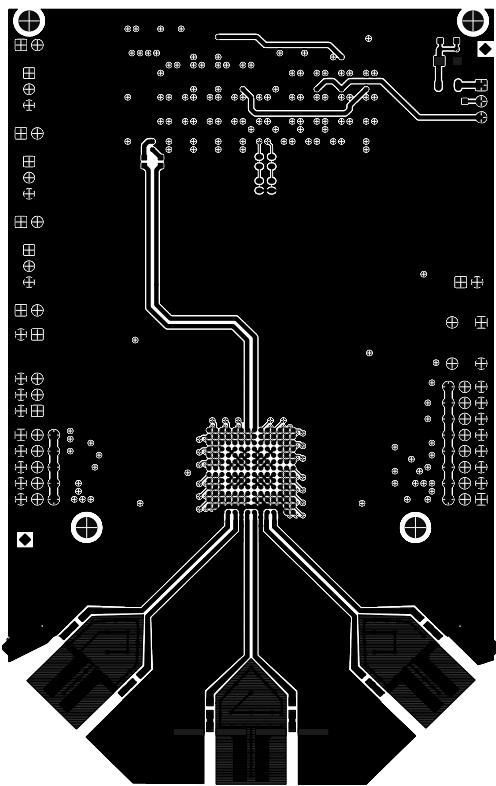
Si5100-EVB Layer 1—Component Side (Daughter Card)
